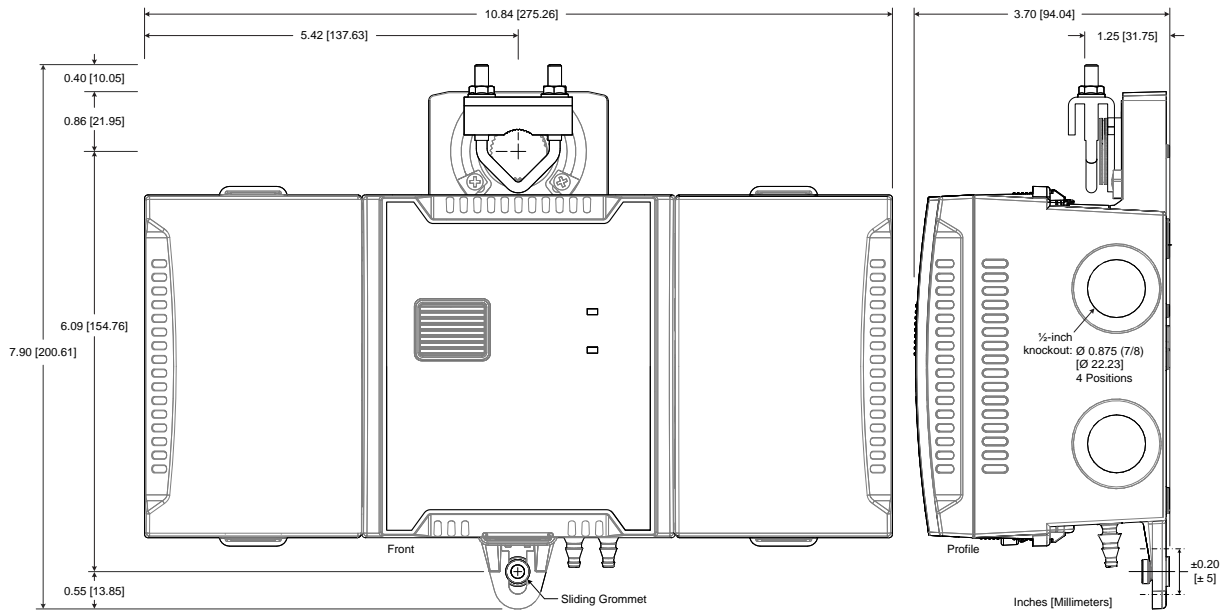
ECB-VAV Controller with Terminal Covers Dimensions
